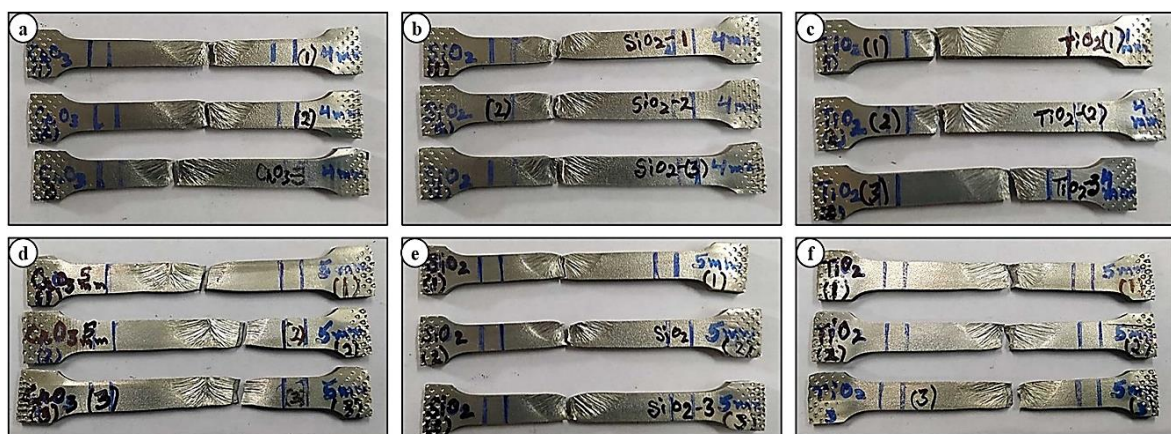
Fractured/ Tested samples of HAW (a) – (c) of 4 mm/s welding speed and (d) – (f) of 5 mm/s welding speed
